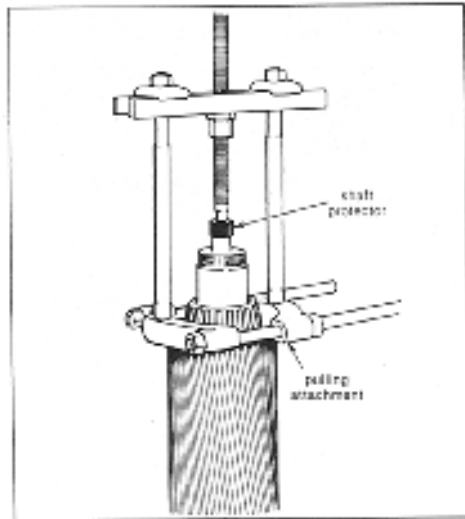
Pulling Bearing Cone from Pinion Shaft.
